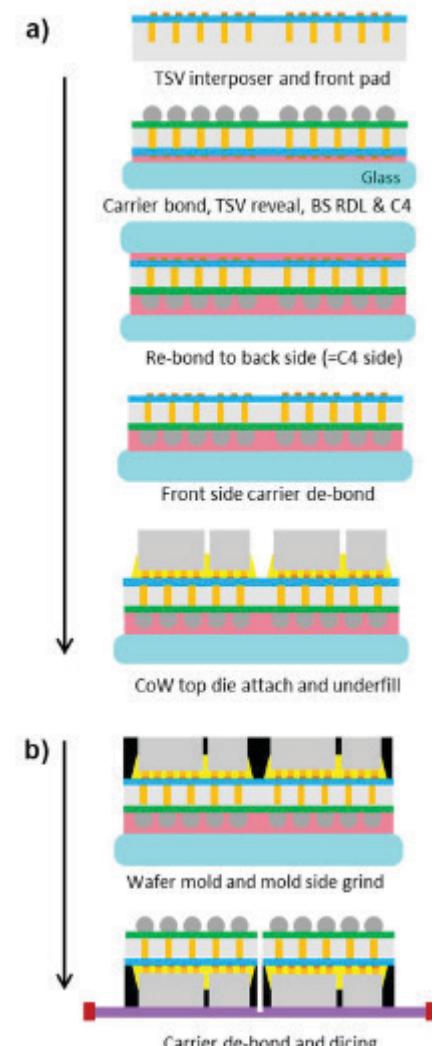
a) MEOL process flow and die attach; and b) wafer finish option of molded wafer format for CoW packaging.
